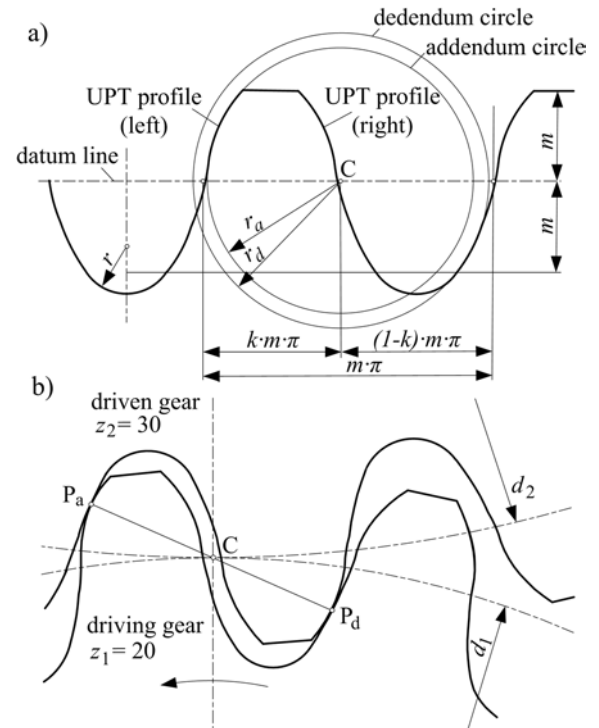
UPT gears [63]; a) shape of the rack-cutter, and b) pair of UPT
